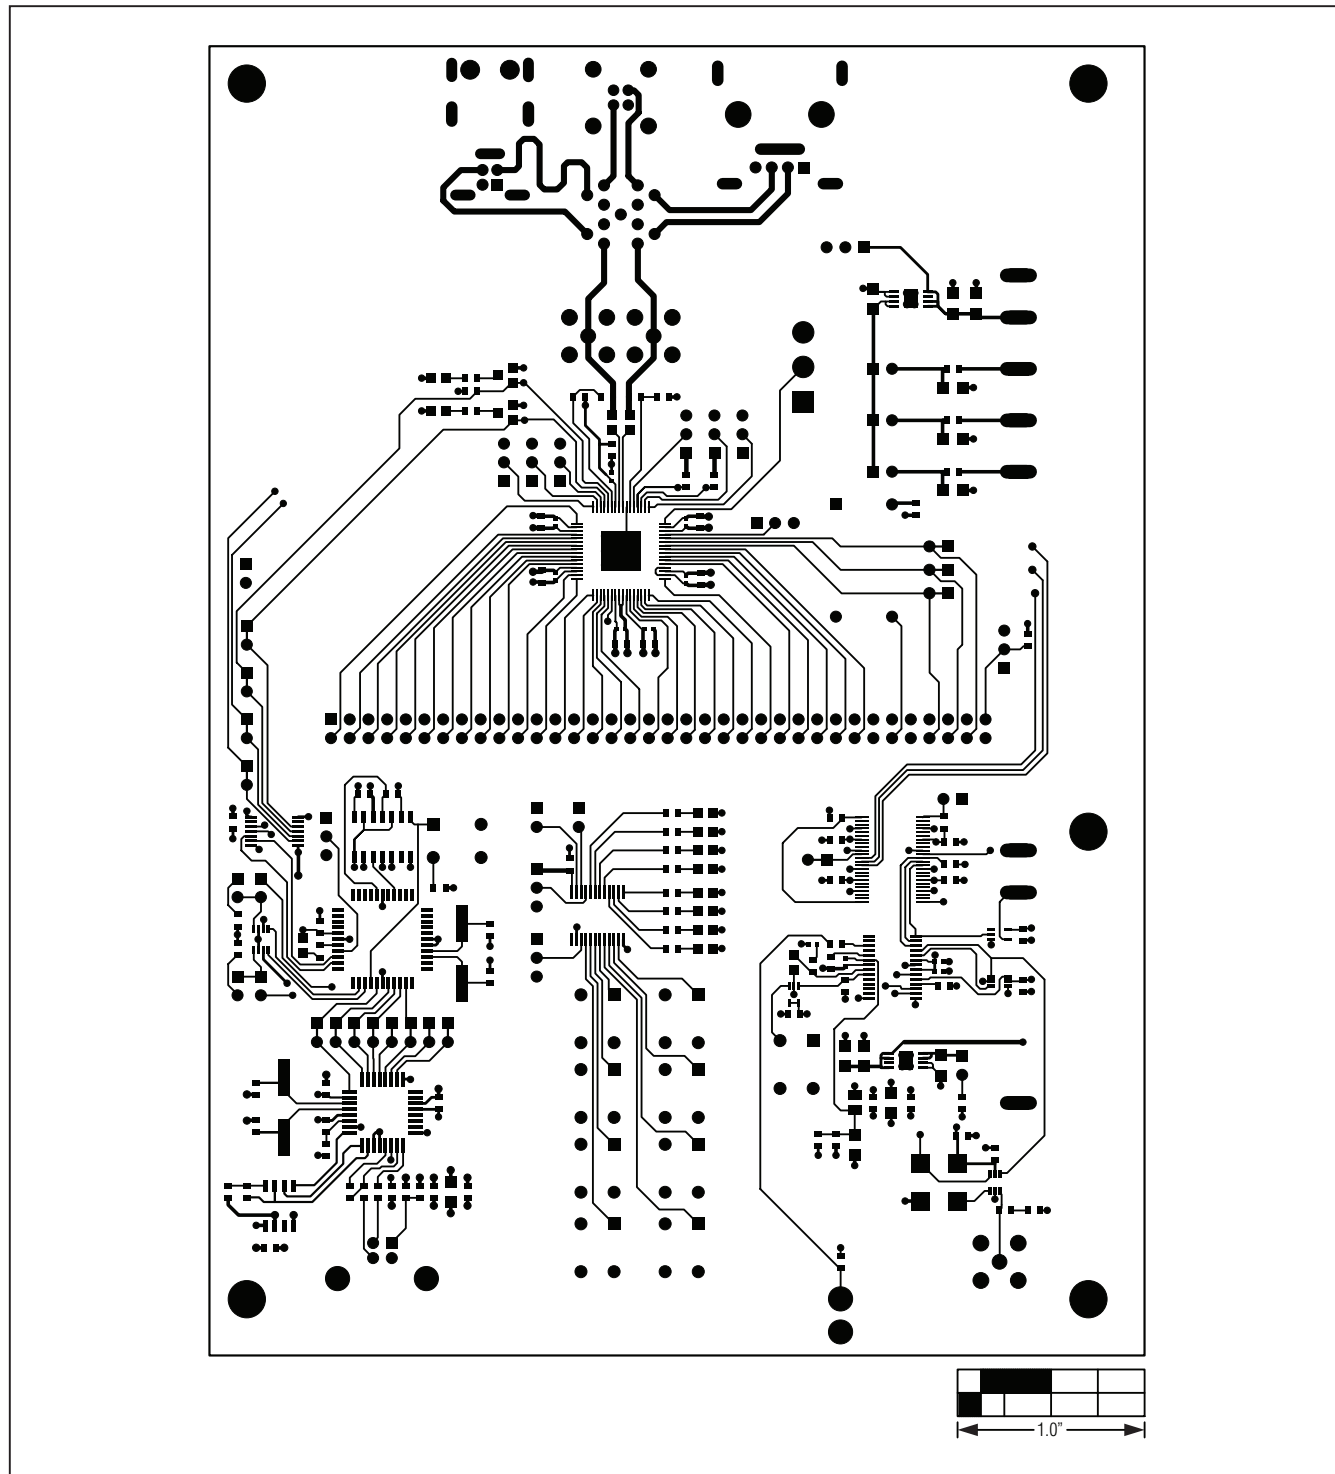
MAX9259 EV Kit PCB Layout—Component Side
